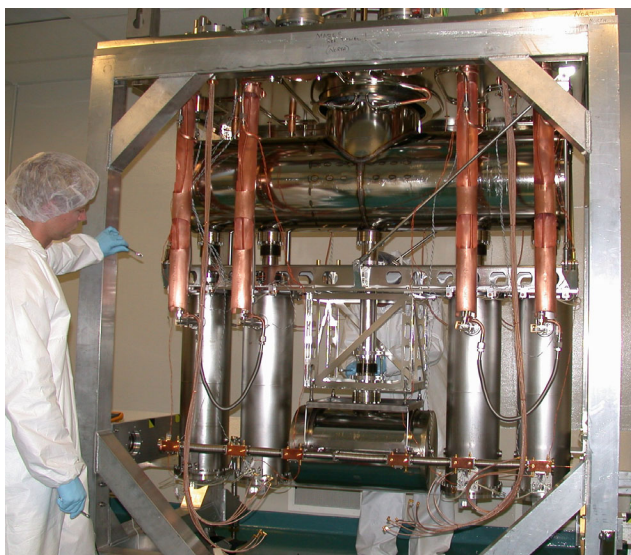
Cryomodule top assembly in the assembly frame prior to the cold test.
